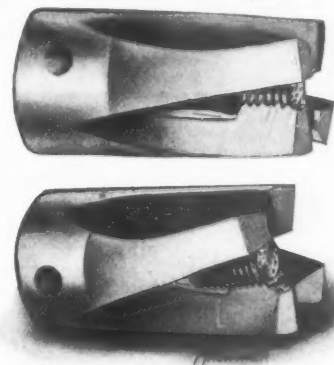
Examples of Threading Dies bent through Lack of Support at Outer Ends of Prongs
